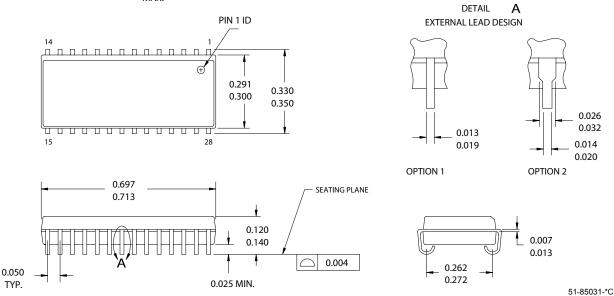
28-pin (300-Mil) Molded SOJ, 51-85031
